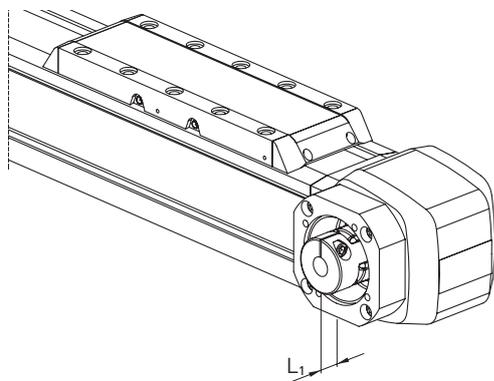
Adjusting the clamping hub distance in the direction of the motor on linear axis HM-B
